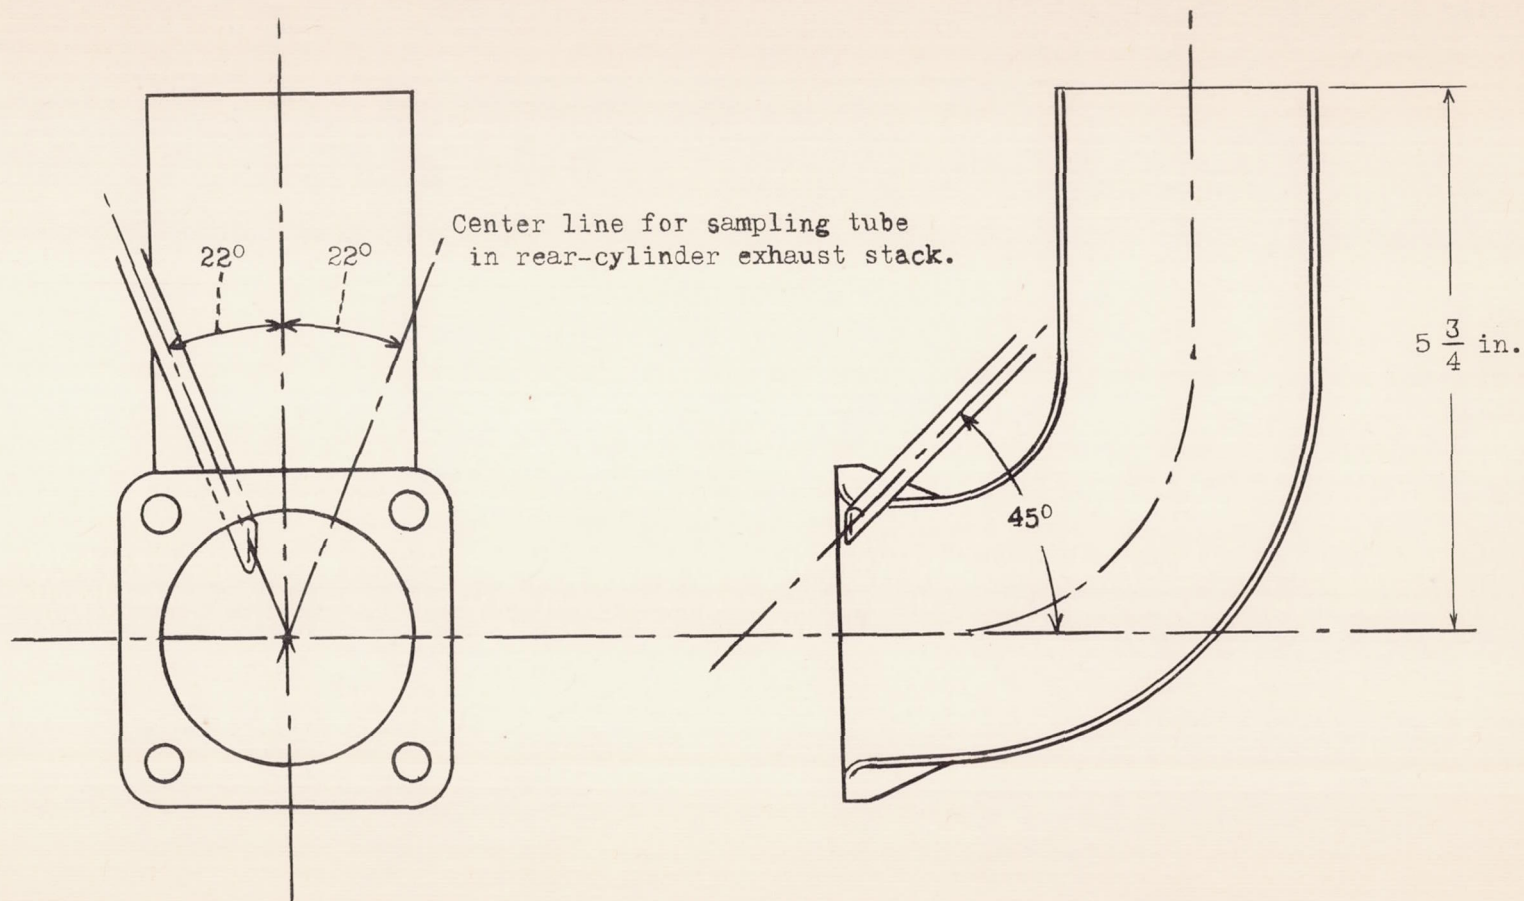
Sampling tube in aircraft-engine front-cylinder exhaust stack.
